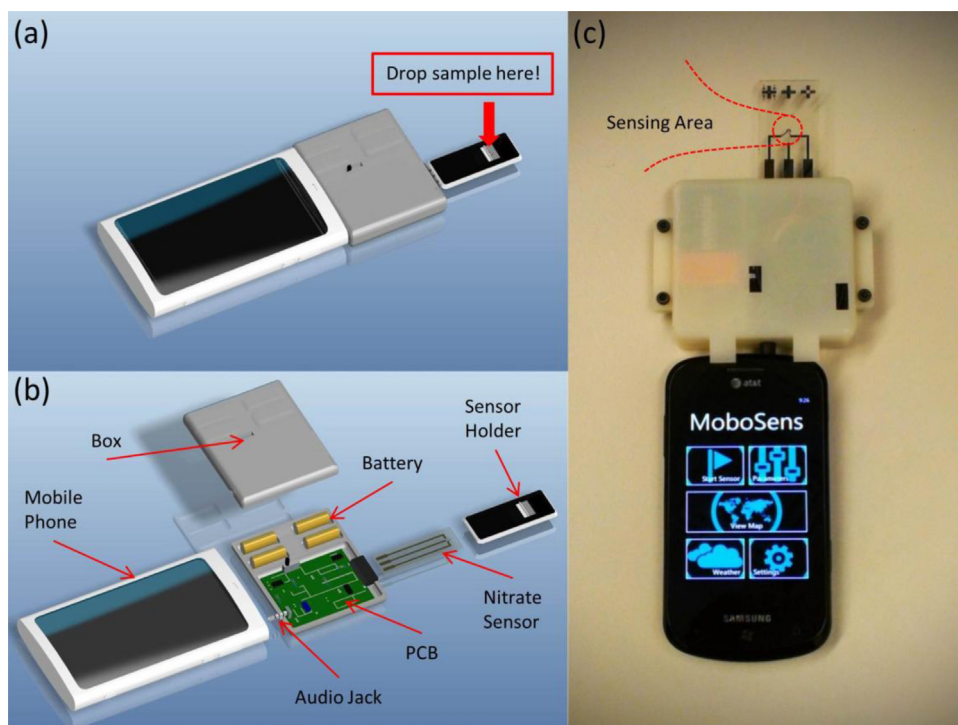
Concept design and real package of MoboSens. (a) Assembly view of MoboSens. (b) Detailed components of MoboSens. (c) Photograph showing the complete MoboSens system.
